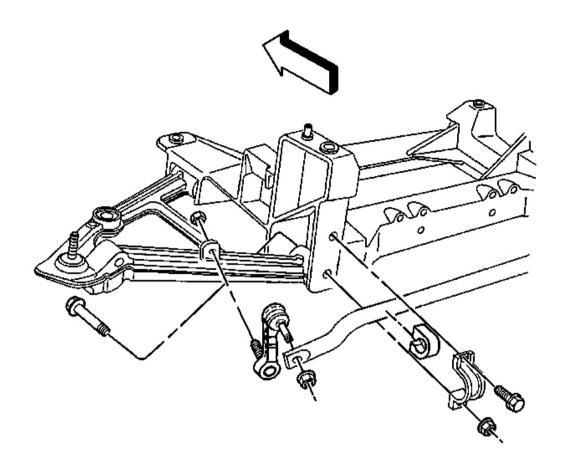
Rear Stabilizer Shaft Brackets, Bolts & Insulators Courtesy of GENERAL MOTORS CORP.
